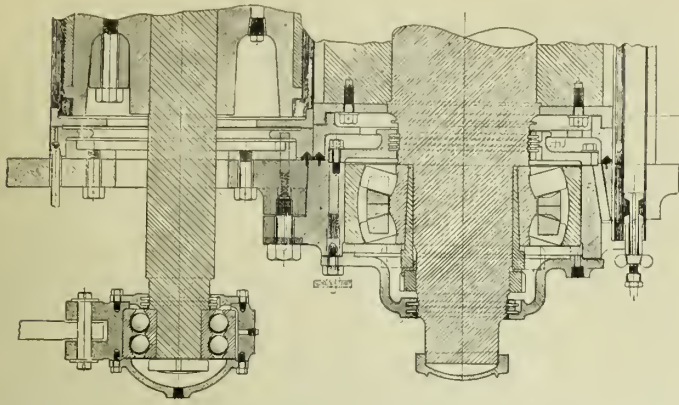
Vacuum Dryer Type 20-60-152, Cross-section of Outgoing Seal Rolls showing End Sealing Rings and Bearings.
